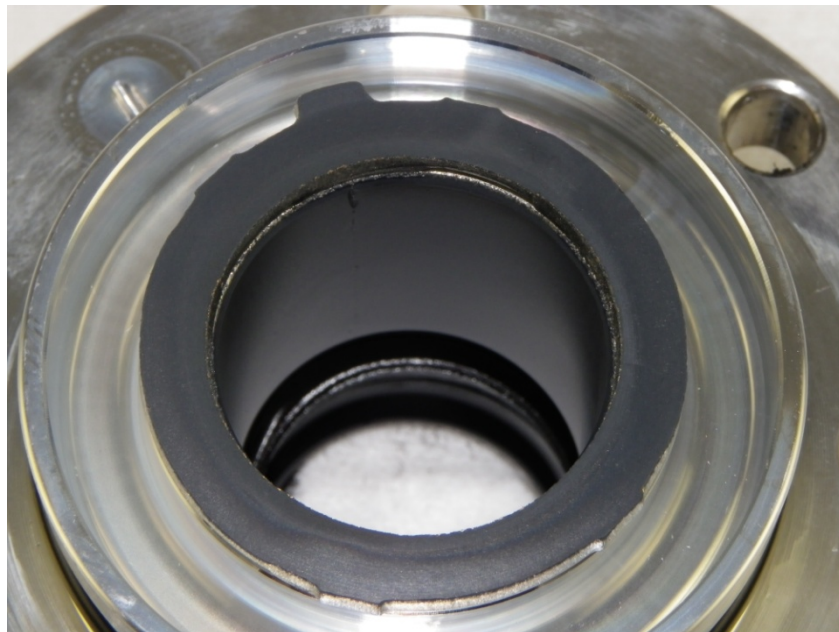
AF8646 ATJ/JP-8 Blend, Front Pump Body Camshaft Bushing
